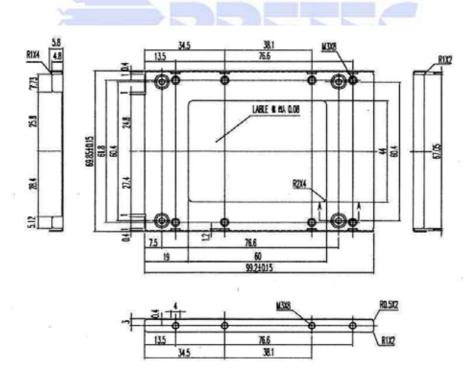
Mechanical Dimensions of 2.5" Tiger IDE SSD (H = 5.8mm)
